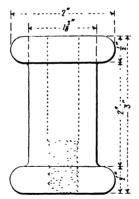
Details of a spool casting which can be employed as a threaded insert for supporting machinery.
